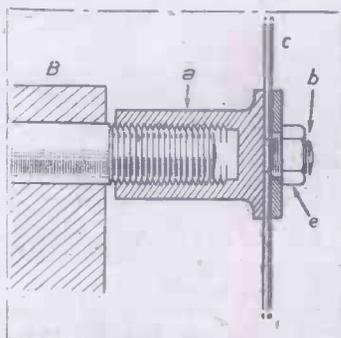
Section showing how the saw is screwed on the end of the lathe mandrel.
